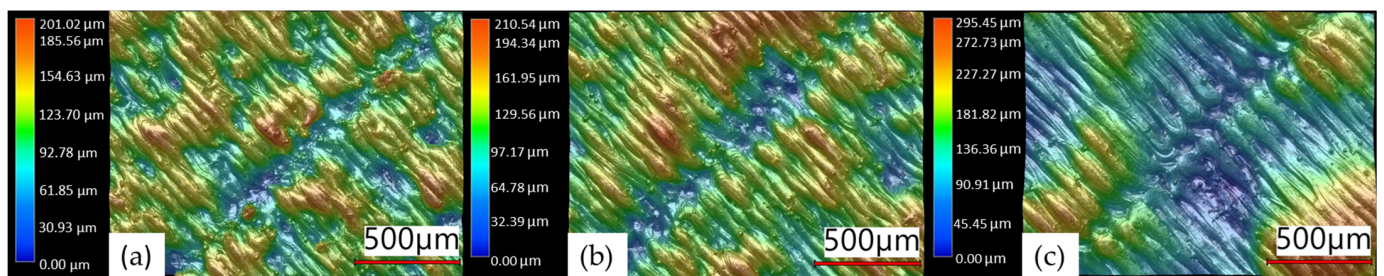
3D Height maps of (a) low-LED test piece (0.23 J/mm), (b) reference LED test piece (0.33 J/mm) and (c) high-LED test piece (0.50 J/mm).
